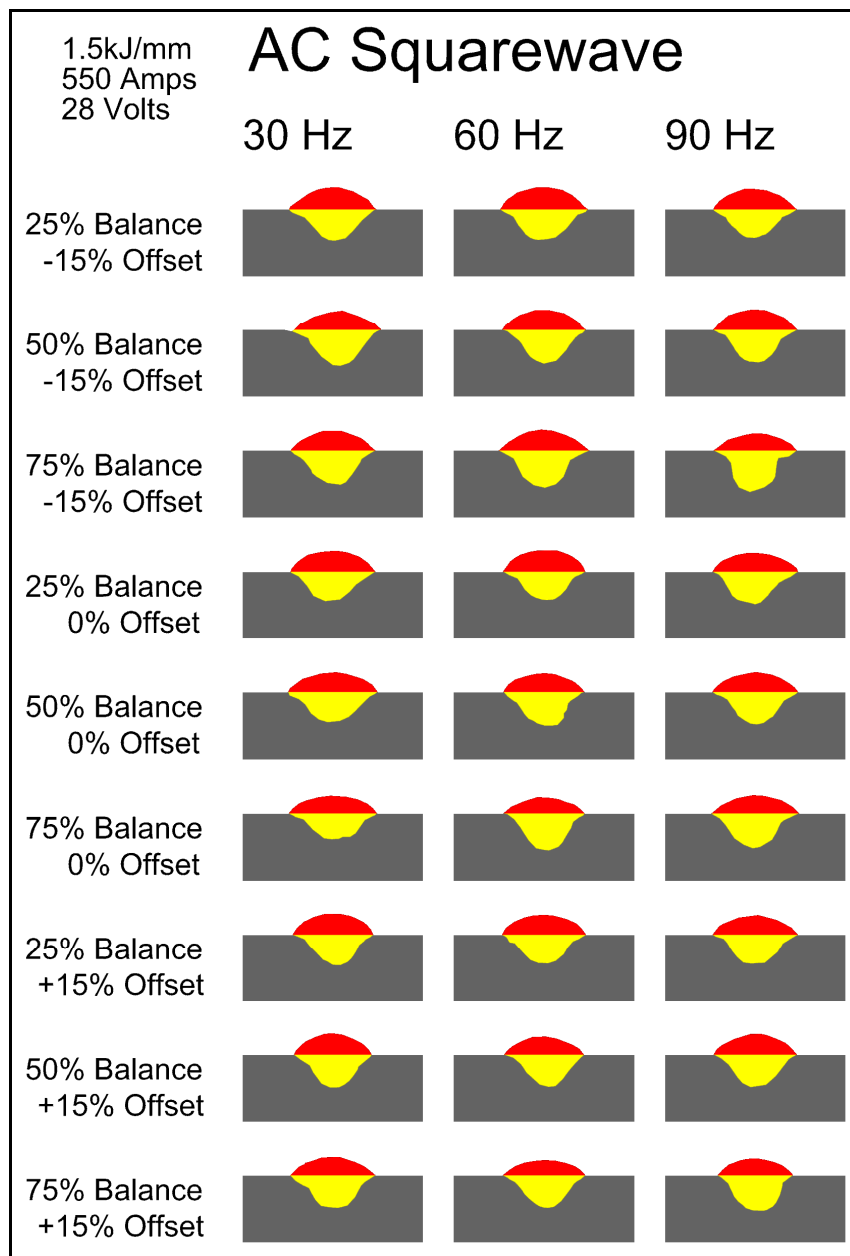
Group 3 Weld Bead Cross-Sections
